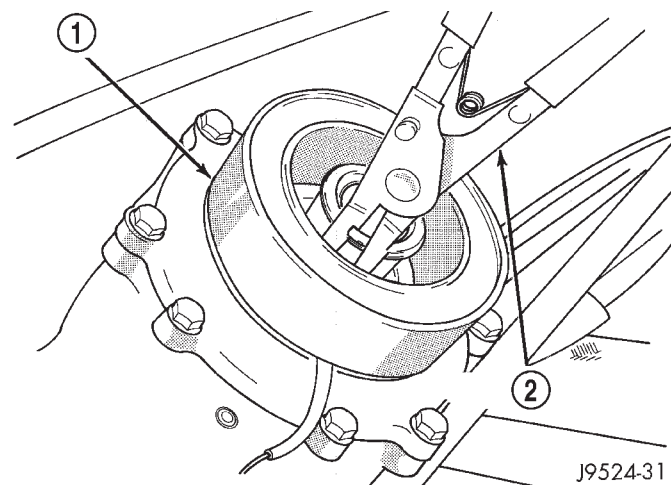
CLUTCH FIELD COIL SNAP RING REMOVE
